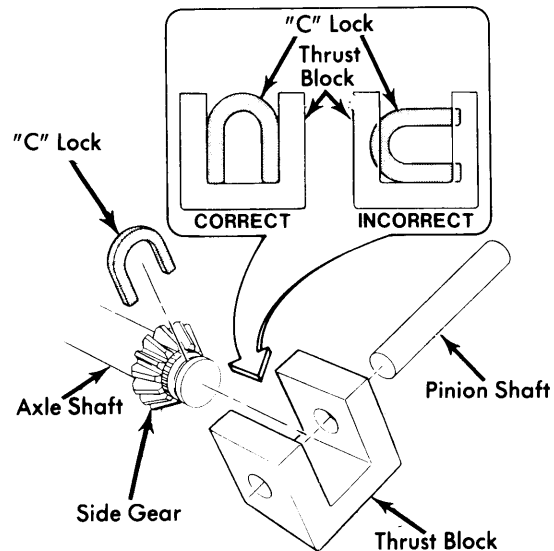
View Showing Correct Positioning of "C" Lock for Removal
